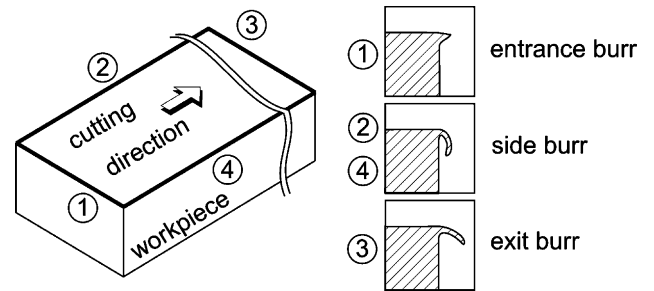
Burr shapes on the workpiece in surface grinding [17].
